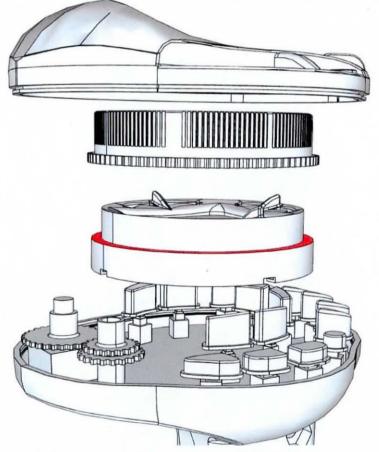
An exploded view with the surface upon which the bezel rotates highlighted in
